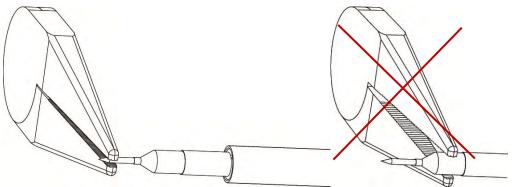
Use pliers to grip and pull the probe tip carefully out of its contact socket (left). Do not grip the white plastic insulator or the probe housing with pliers (right).
